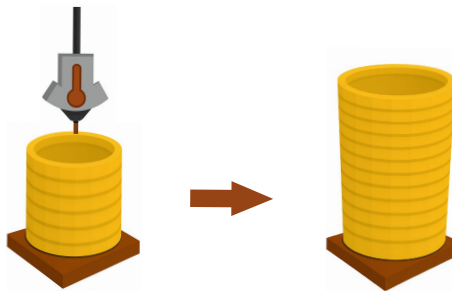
Illustration of the additive manufacturing (3D printing) process of a cylinder printed on top of a build platform.
